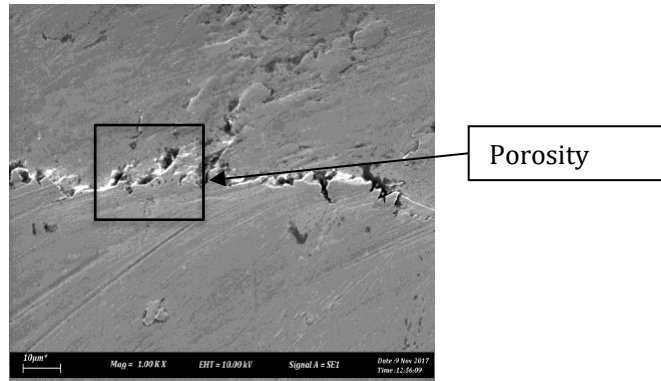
Porosity on the workpiece surface observed at standard run 10 (125 m/min cutting speed, 0.50 mm/tooth feed rate and 0.10 mm depth of cut)
